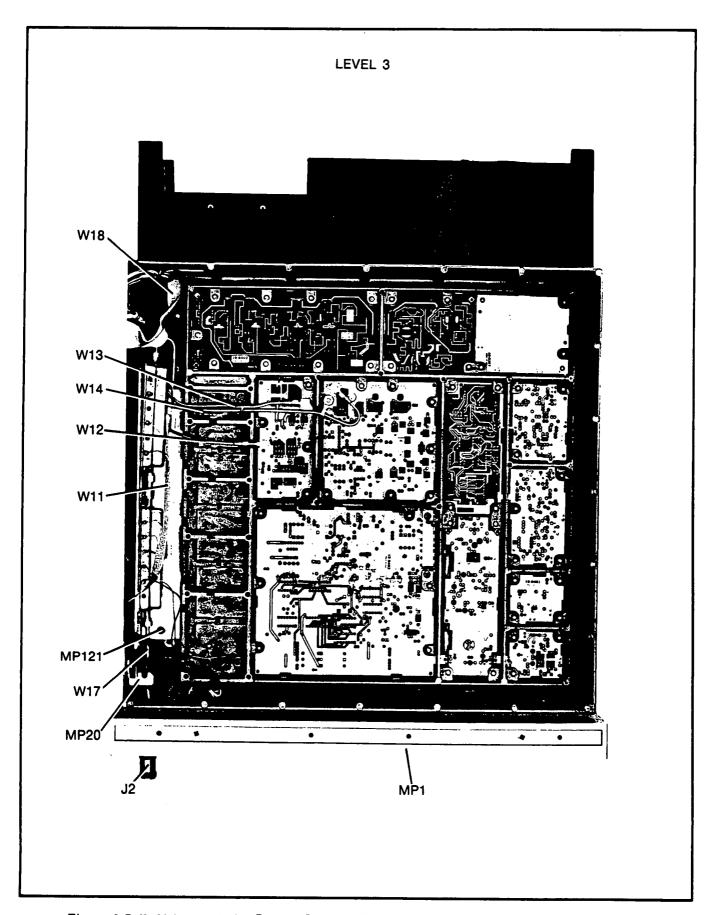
(2425A to 2509A). Bottom Internal View; A10/A11 Assemblies in Service Position
